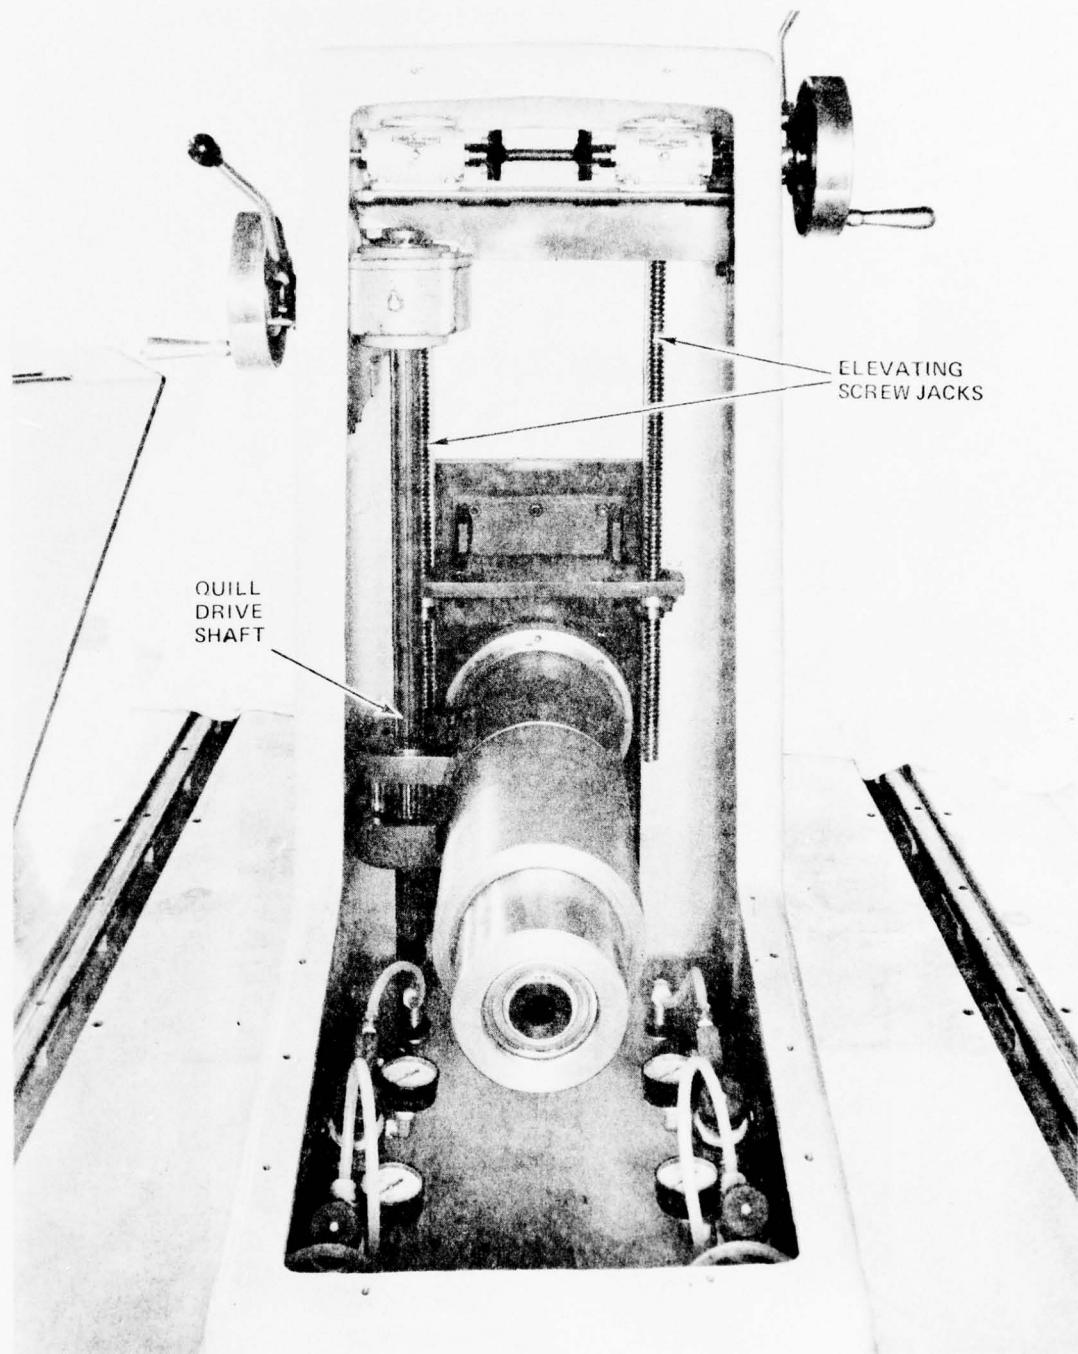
Tailstock Assembly, Rear View, Cover Removed
